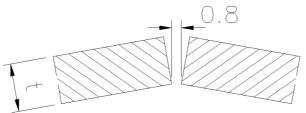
Preparation of the element for manual welding, thickness t = 1.8 mm
